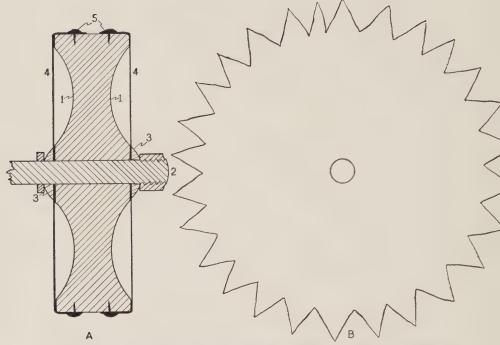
Double-faced Leather Polishing Wheel. A, front cross-section of wheel with leather polishing surfaces on each side; 1, concave sides of wheel; 2, spindle of arbor; 3, flanges; 4, leather surfaces; 5, thumbtacks. B, leather disc cut to size, with tabs around the periphery for tacking it to the edge of the wheel. The tabs need not be equal in size.
